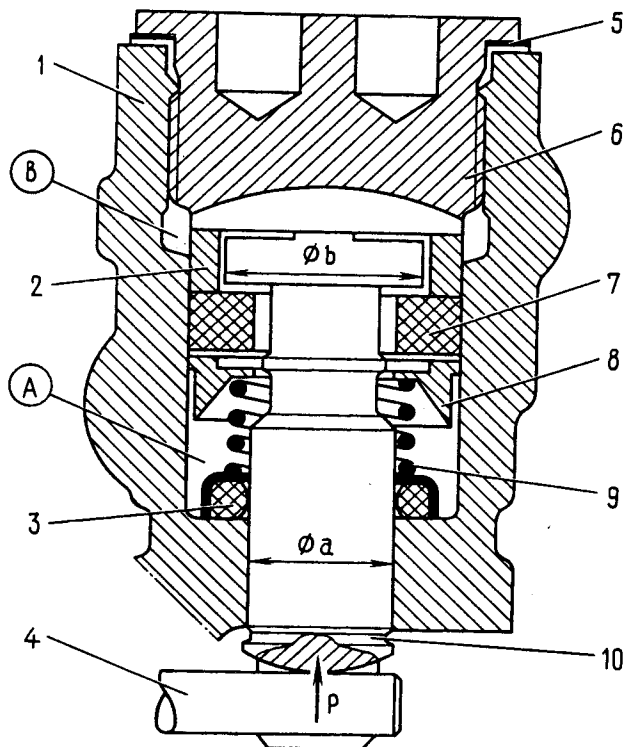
Rear Brake Pressure Regulator (Inactive Position):
